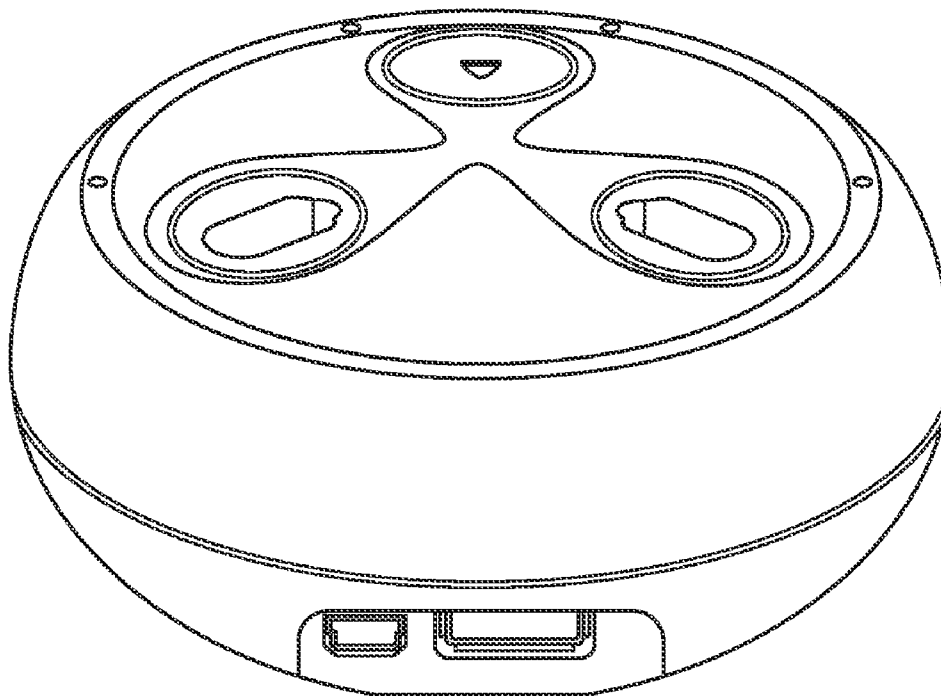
is a rear perspective view of the hearing aid charger of our new design;
